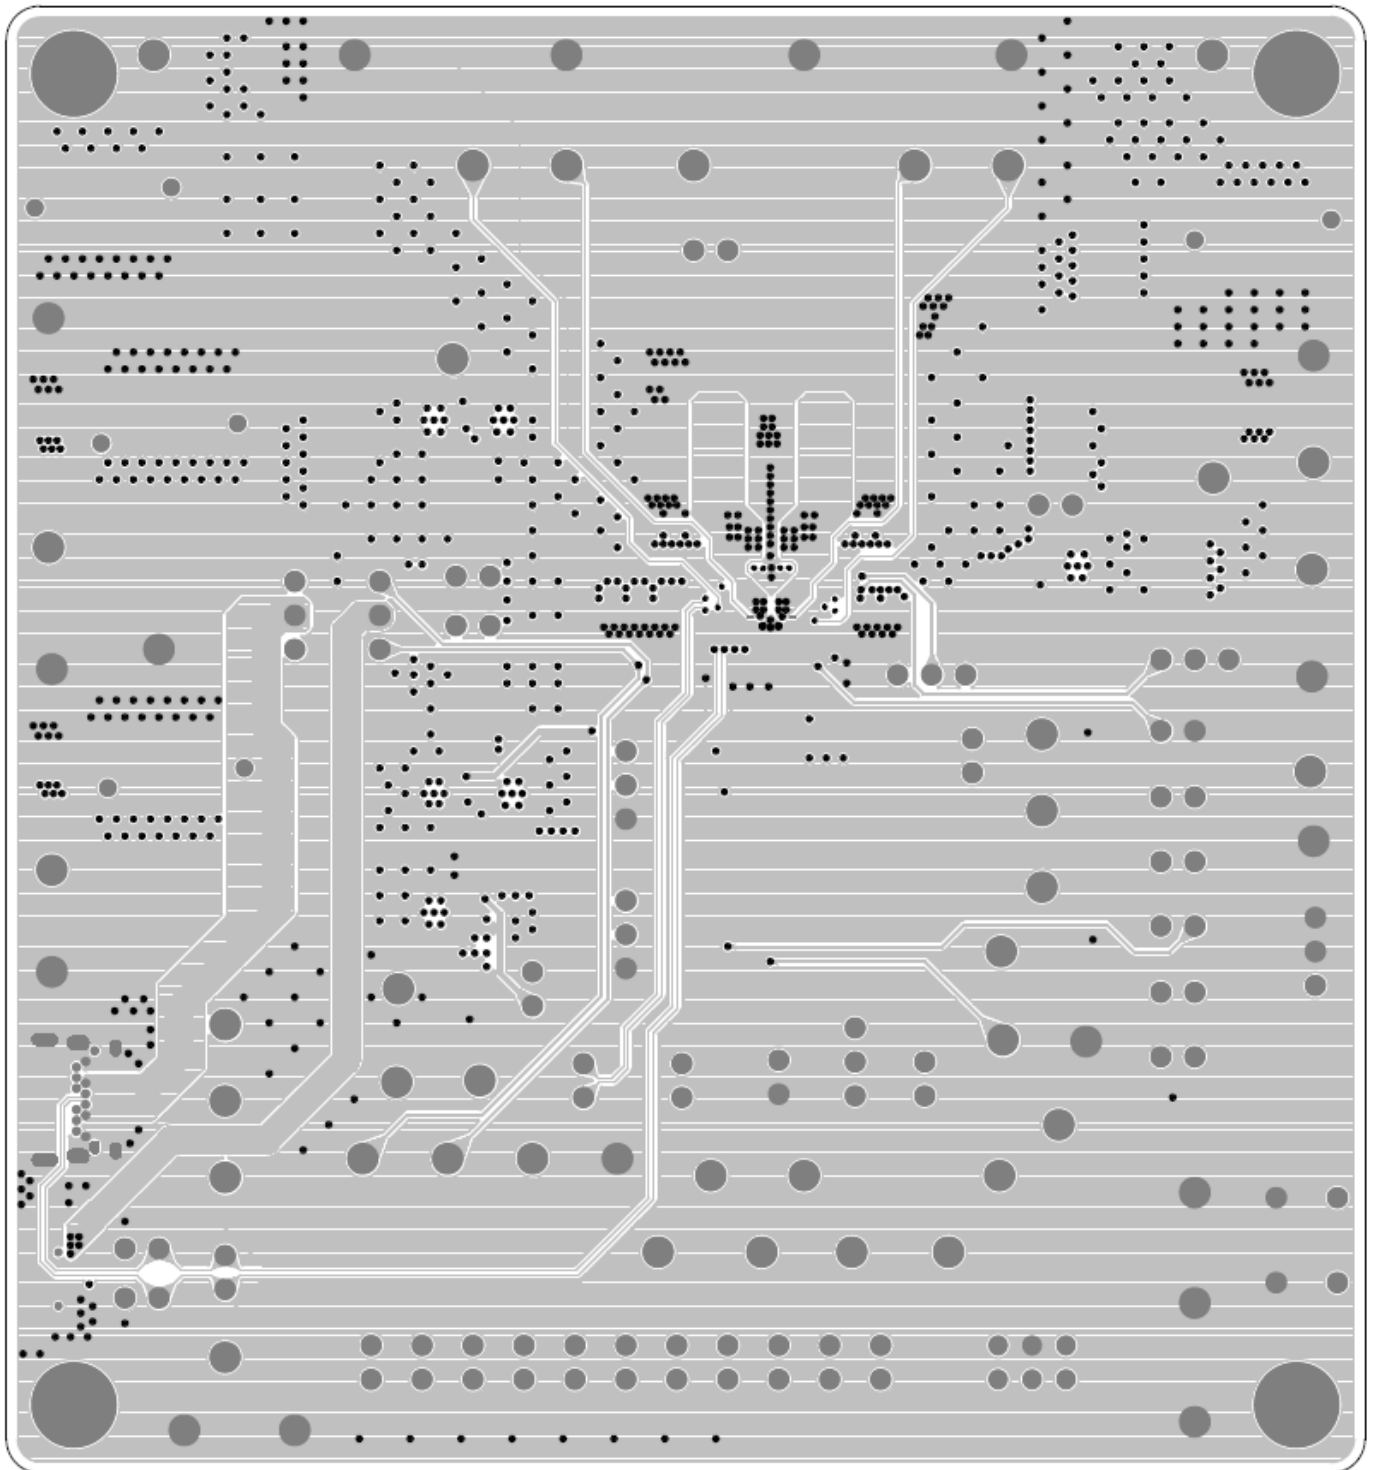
PCB Layout—Inner Side (3<sup>rd</sup> Layer)
